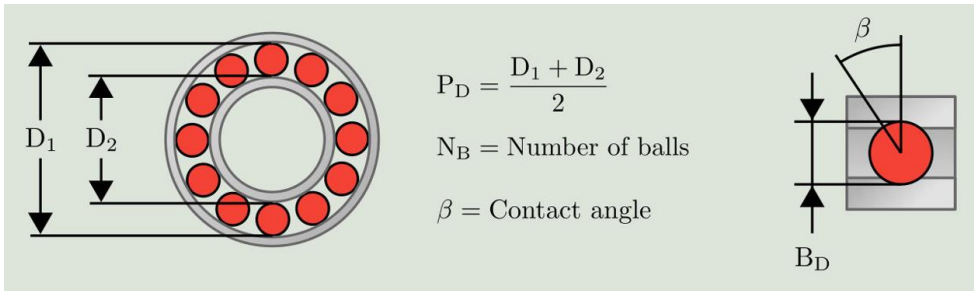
Dimensions of a bearing needed for rollover frequency calculations. [64]
